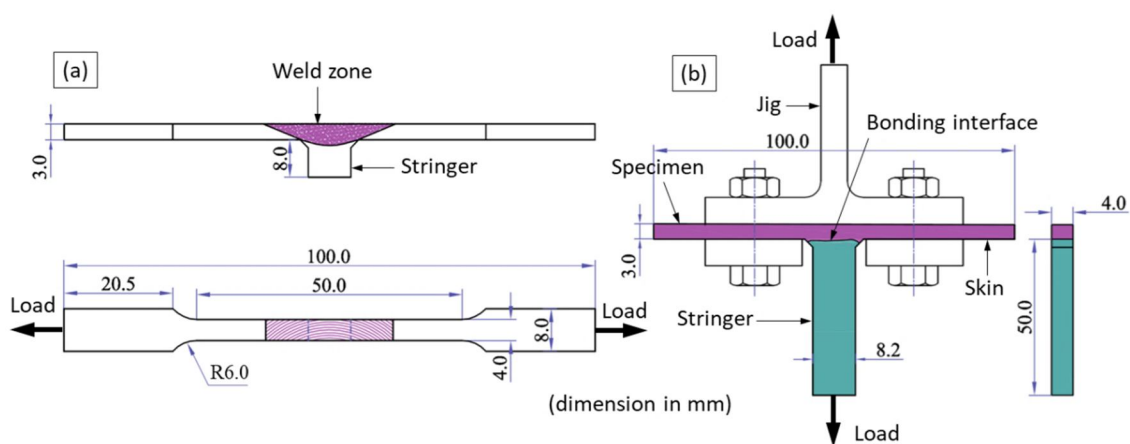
Evaluation of T-lap joints: (a) skin and (b) stringer tensile tests.
